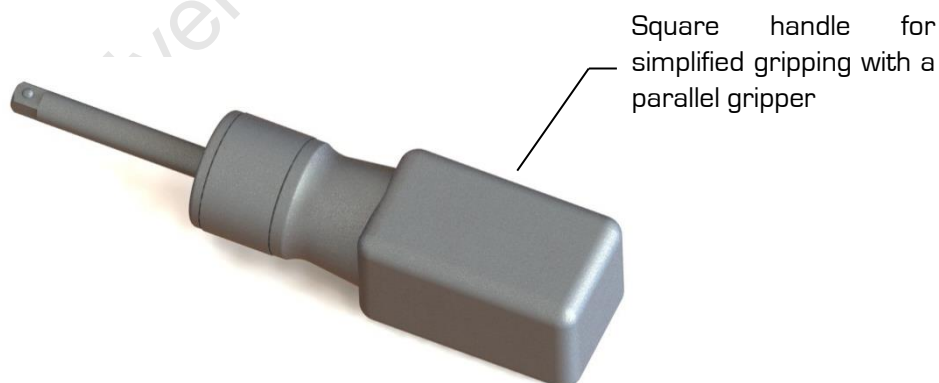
Potential Grippable Socket Tool (Modified from [73])
